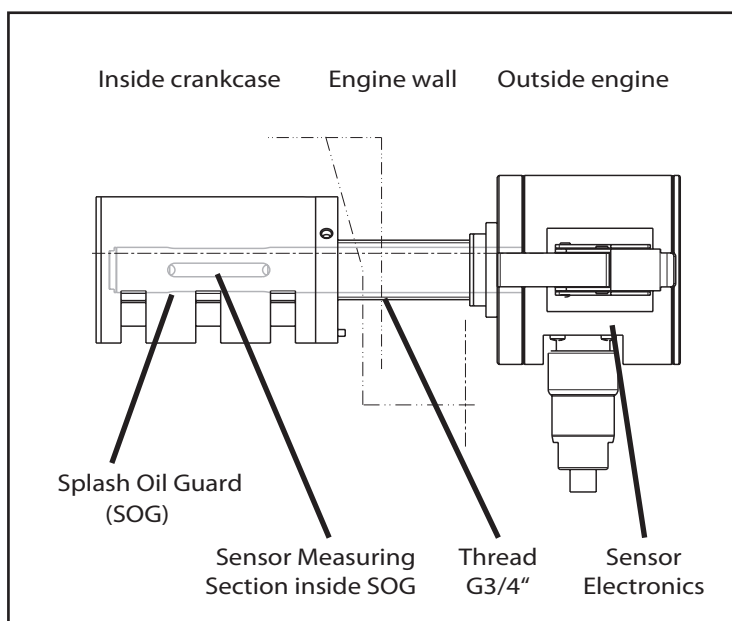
Exemplary assembly of the SiCOMS® sensor
